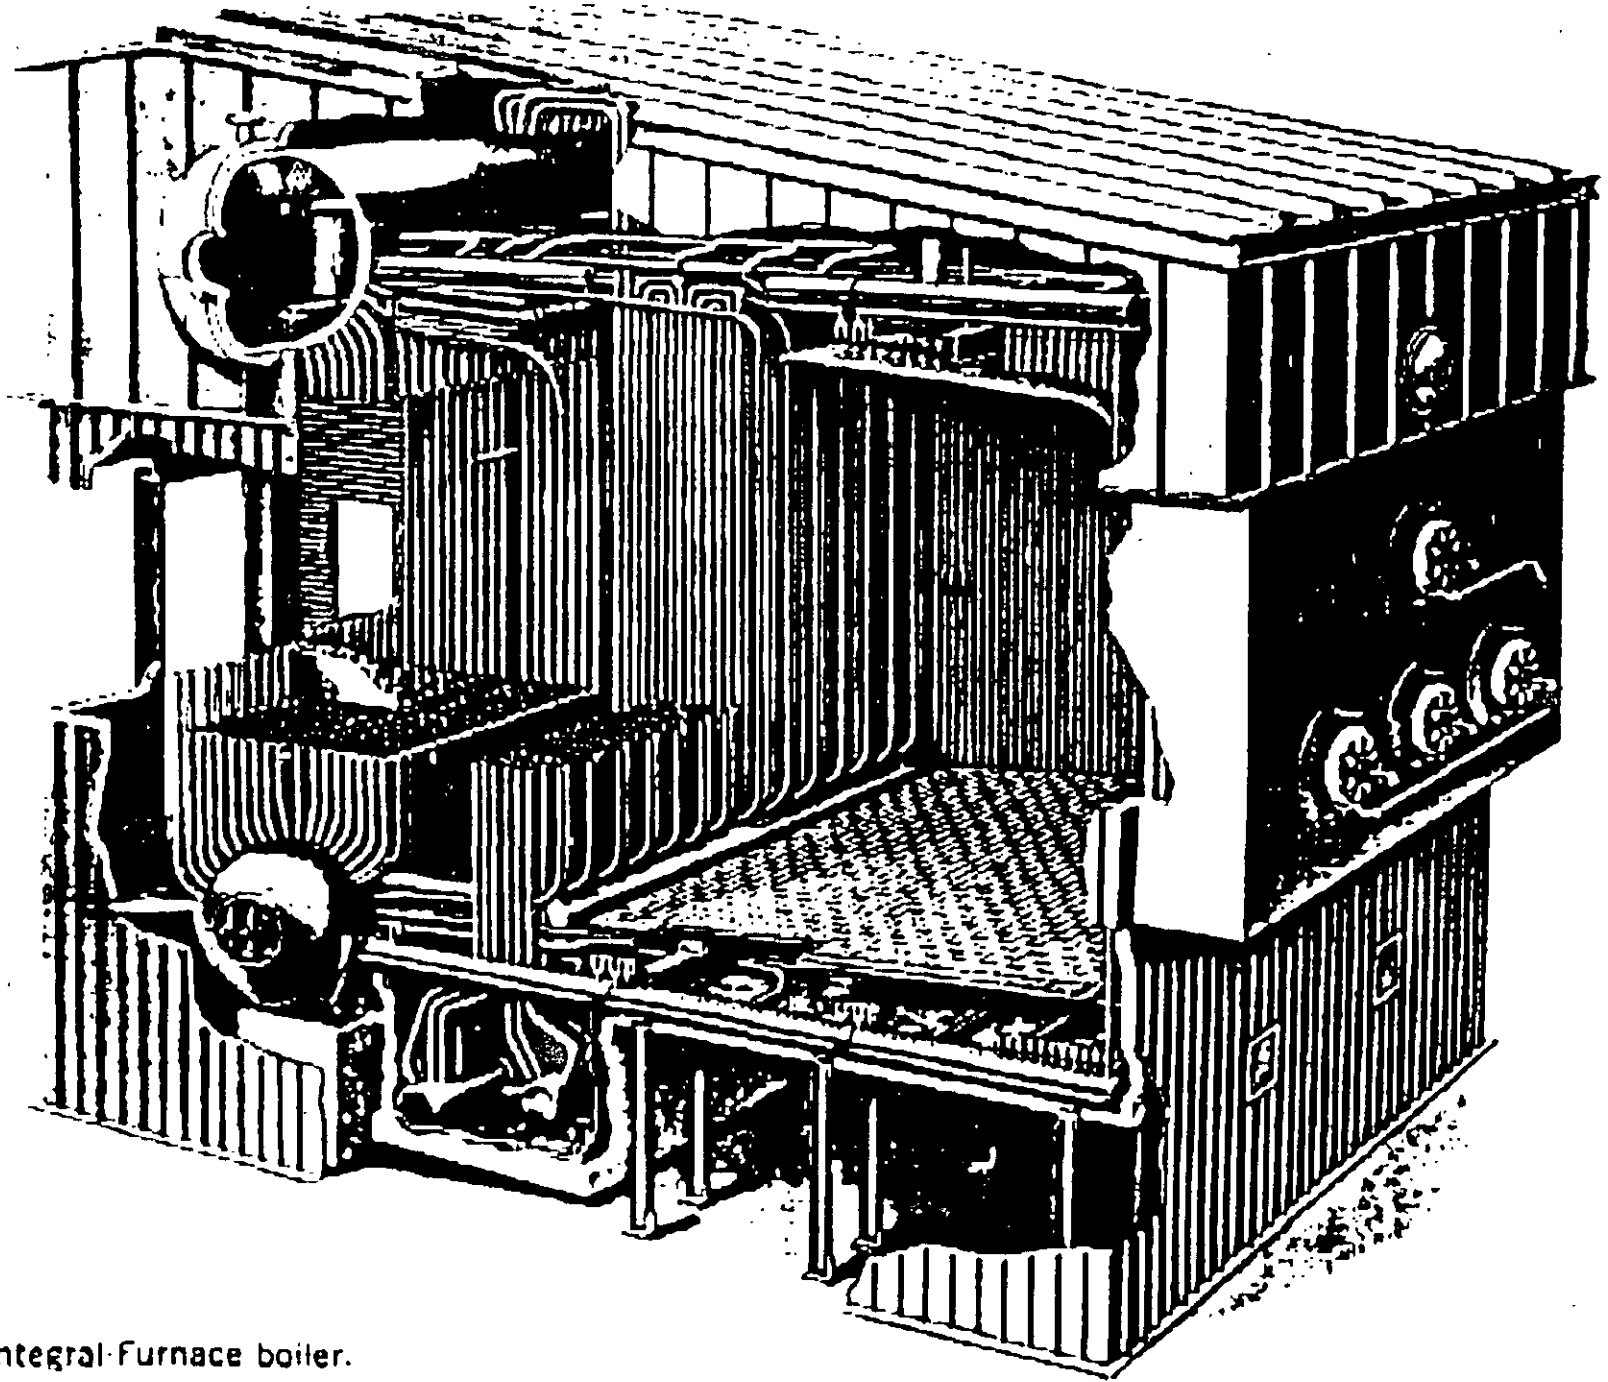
Part-sectionalized view of Babcock type FM boiler showing integral water-cooled furnace and compact construction of the unit with pressure-tight steel casing, rigid framework and forced-draught oil burner.
